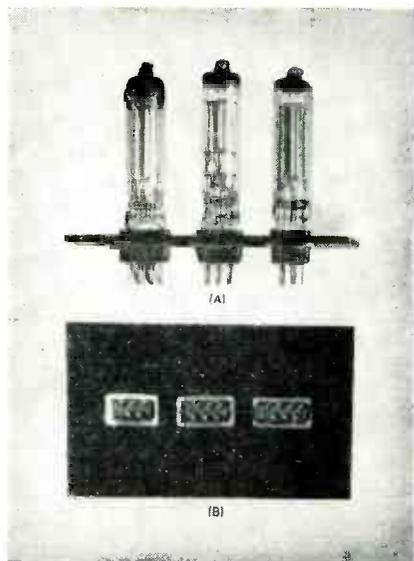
Tube socket is held in chassis hole by retaining clip, thus eliminating space otherwise required for bolts
